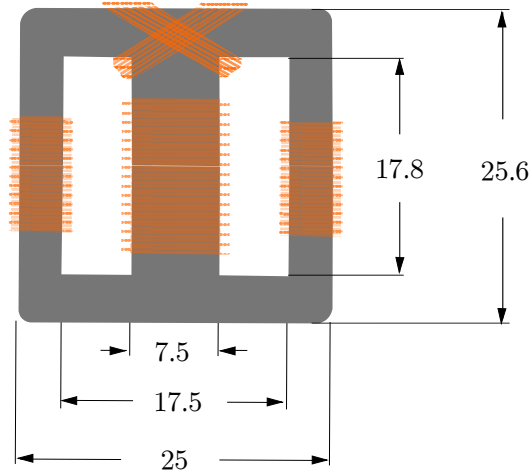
E-E core transformer (dimensions in mm) and the located windings.
